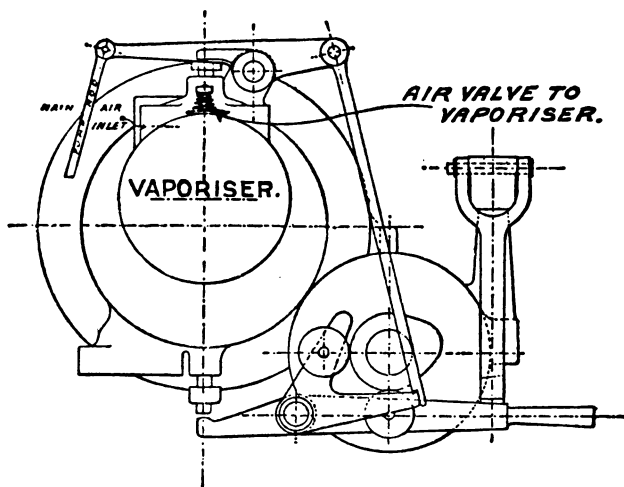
Elevation showing Arrangement of Valve Levers and Trip Gear of Fielding and Platt's Oil Engine.
